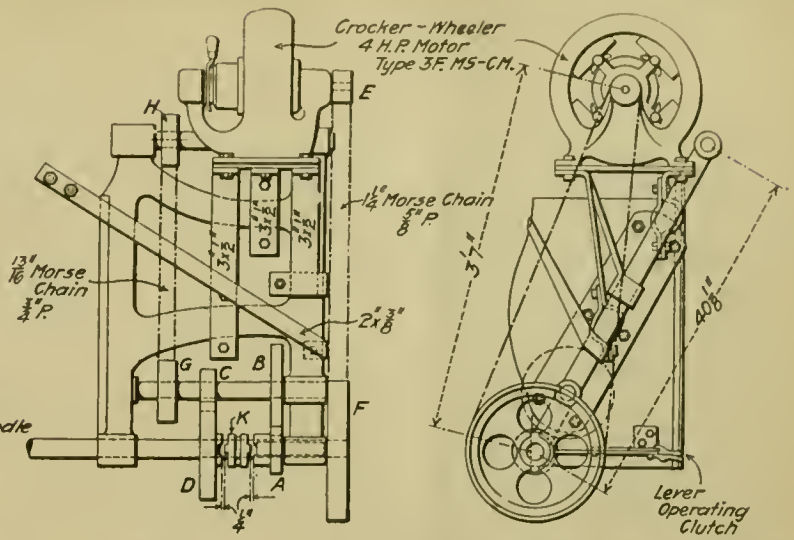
DETAILS OF THE APPLICATION OF THE MOTOR DRIVE, SHOWING METHOD OF MOUNTING THE MOTOR UPON THE BRACKET BY MEANS OF THE WROUGHT-IRON PLATE AND STRAPS.
